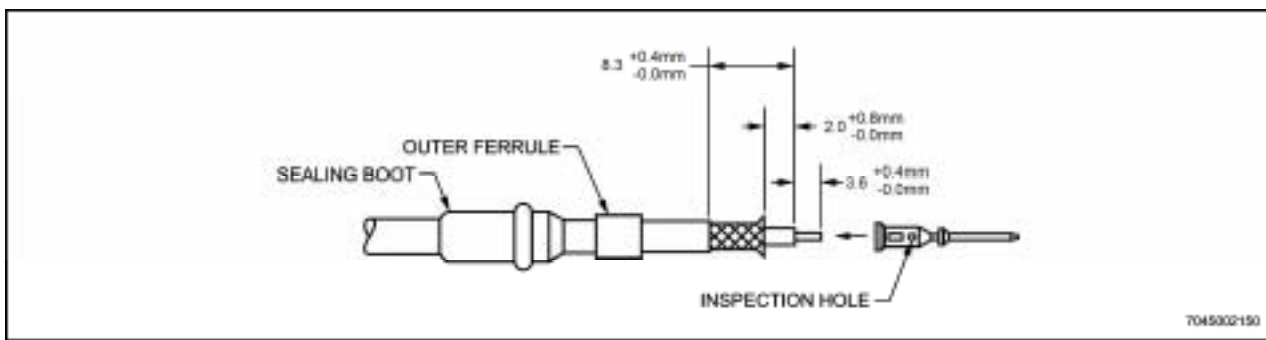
Stripping Dimensions, Sealing Boot, Ferrule and Contact Before Crimping the Contact
